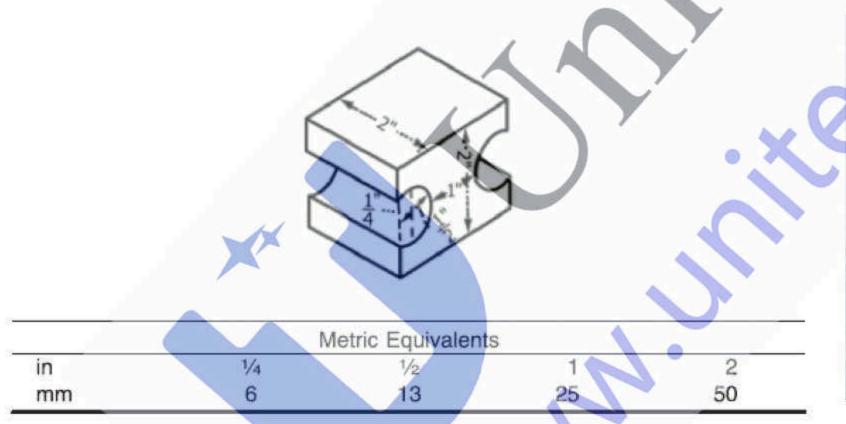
Tension-Perpendicular-to-Grain Test Specimen
